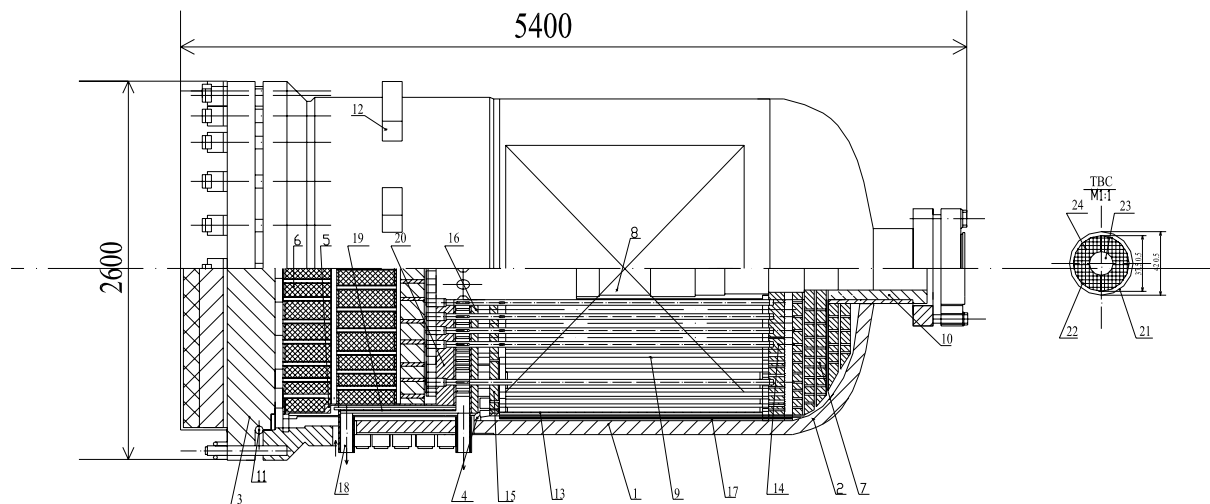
Design of high-temperature gas-cooled reactor. 1 - vessel 2 - bottom 3 - cap 4 - holder of active zone 5 - holder of heat releasing assembling (HRA) 6 - upper shield plug 7 - edge-joint screens 8 - neutron-producing target 9 - active zone 10 - cooled socket for target strengthening 11 - tubular thickening 12 - elements of strengthening of bio-protection 13 - carrying shell 14 - bottom bearing plate 15 - intermediate plate 16 - dividing plate 17 - sidelong screen 18 - sockets "pipe in pipe" type 19 - shell of HRA holder 20 - upper plate of HRA holder 21, 22, 23 - tube of HRA 24 - ball-shaped elements of HRA
